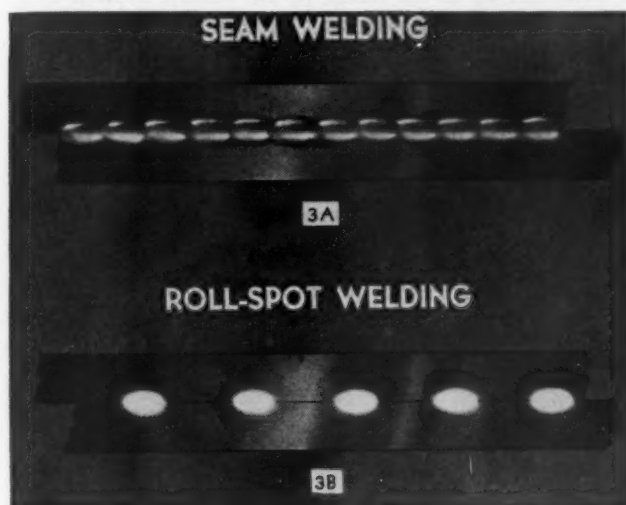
Timing of current flow between electrodes gives desired weld spacings
